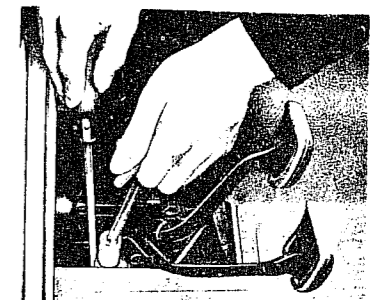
Adjusting the push rod clearance by moving the pedal stop plate.
